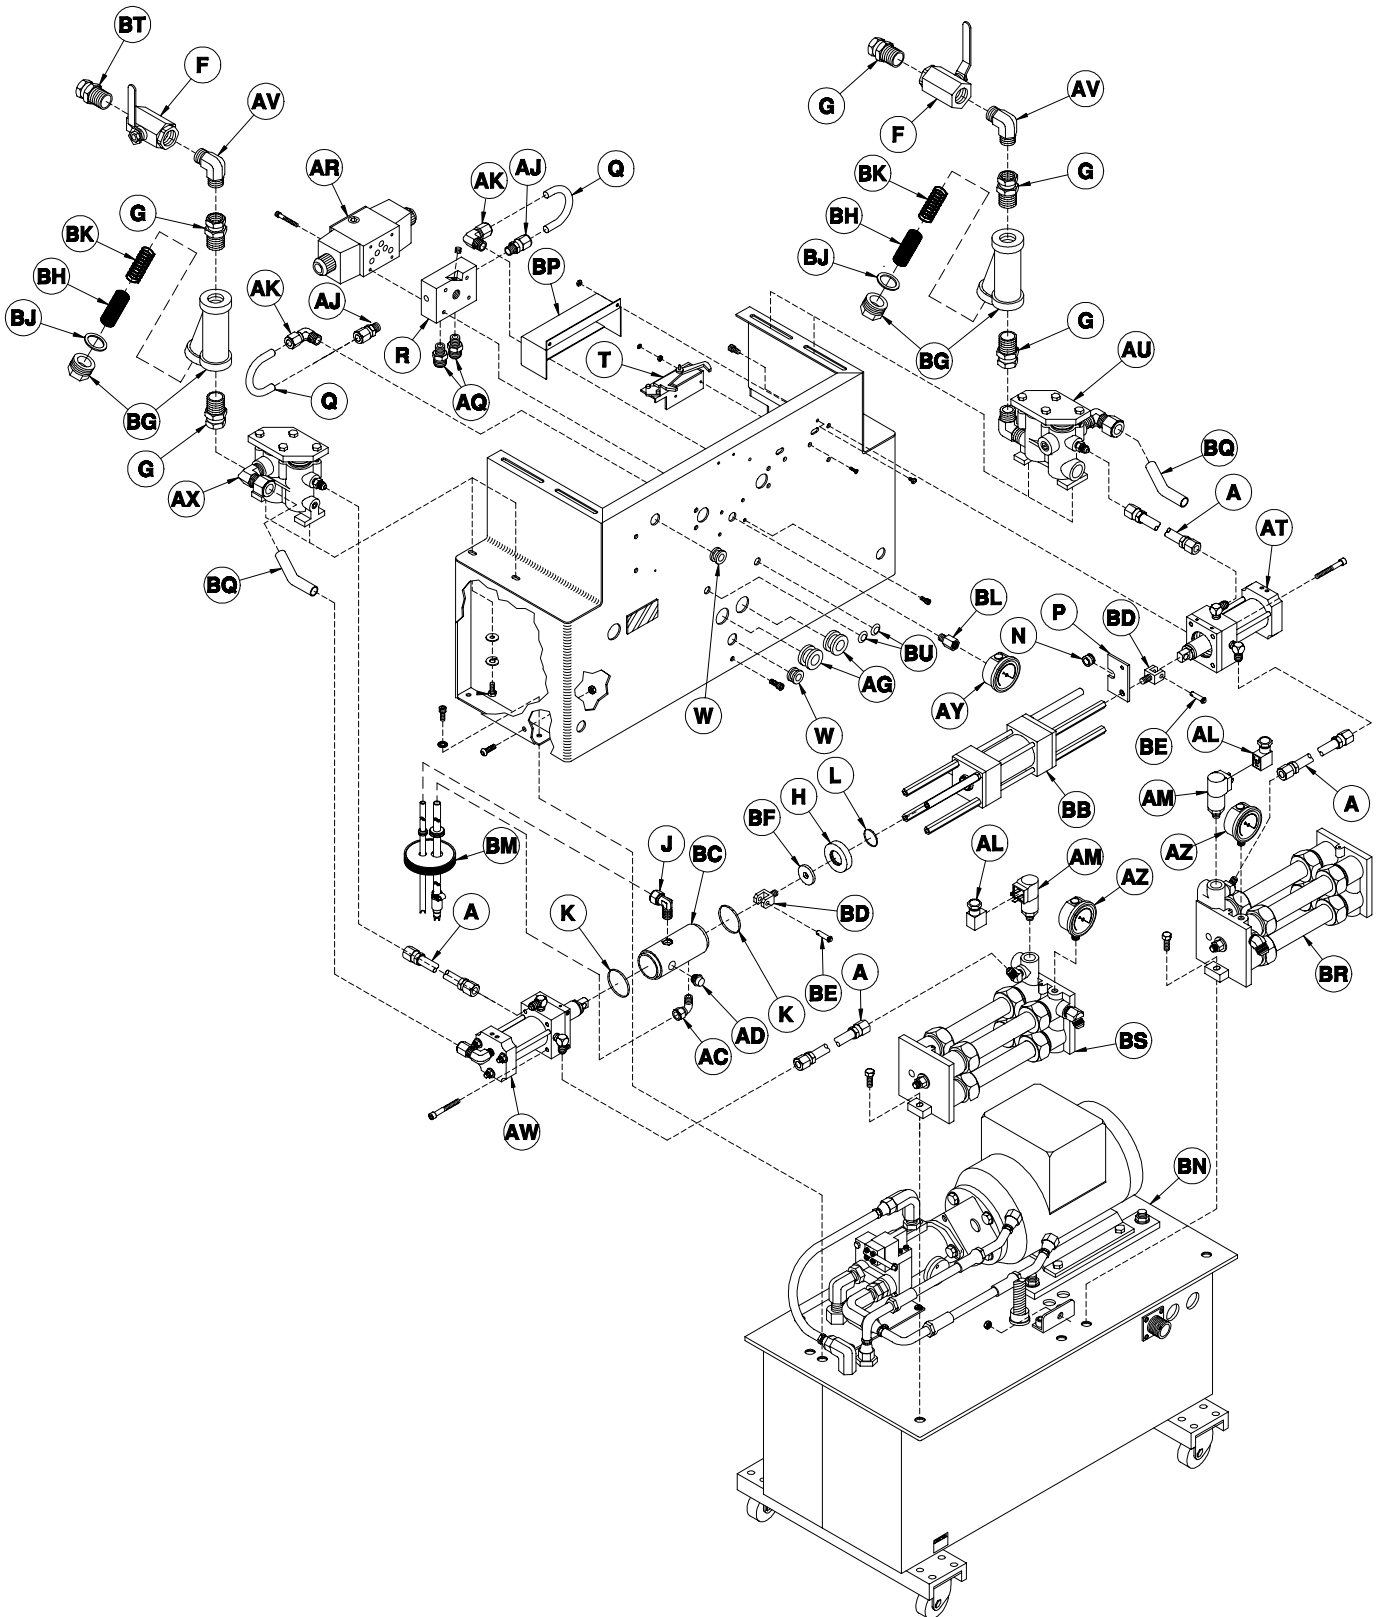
Center and Base Assembly (Part No. 55500A-5HP-SIZE), Exploded View
